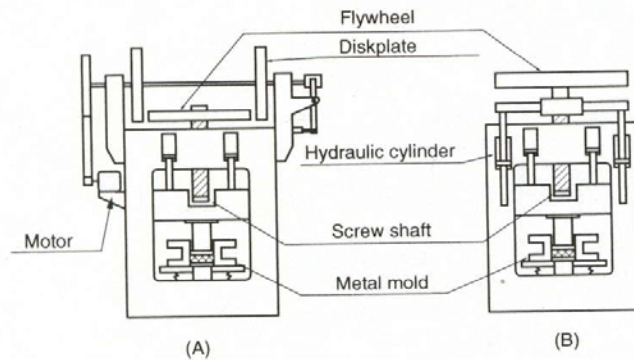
Friction Press (A), and Hydraulic Screw Press (B)
